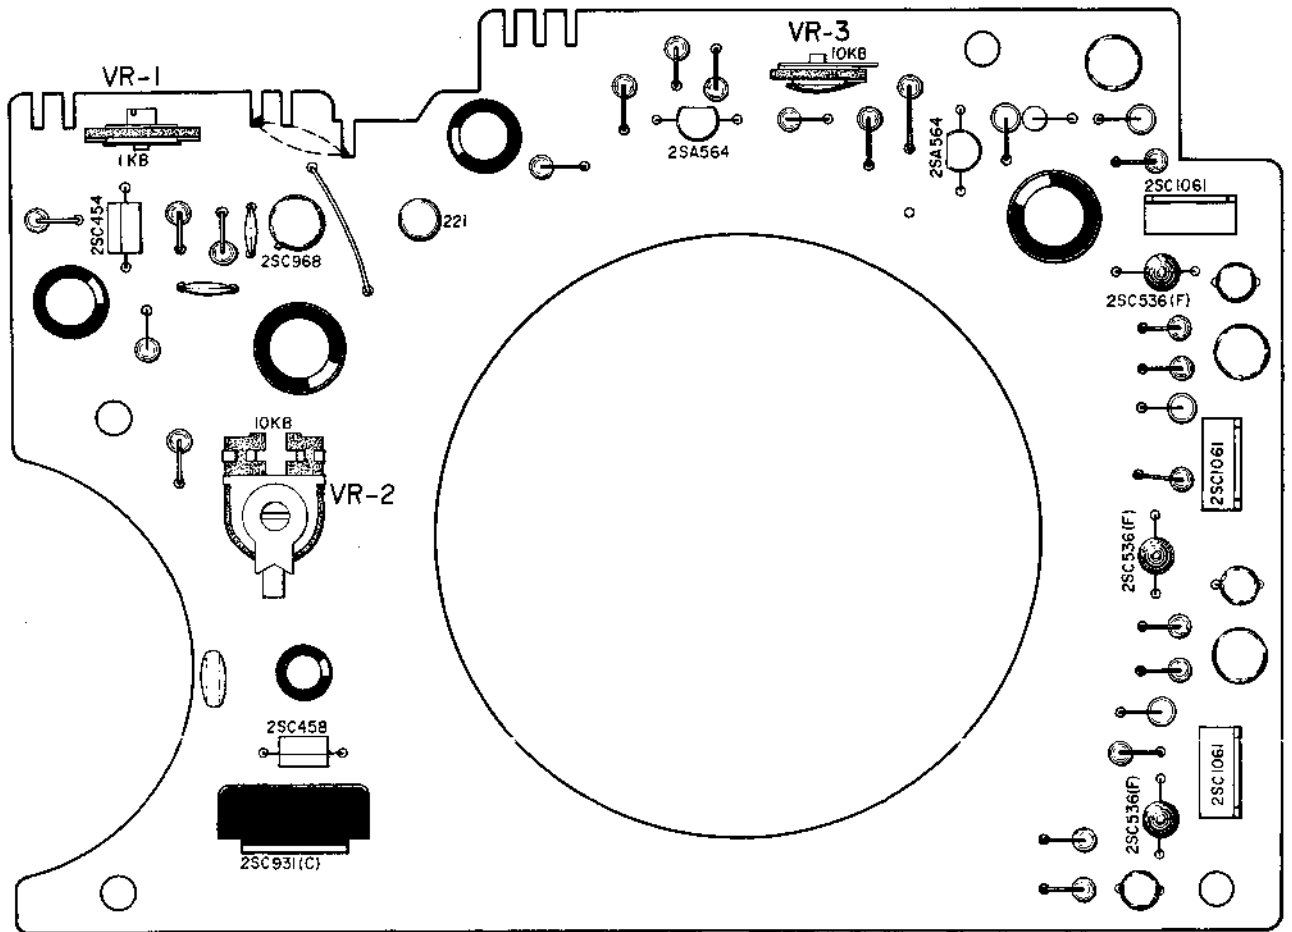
C.M.D. P.C. Board (PX-507)
